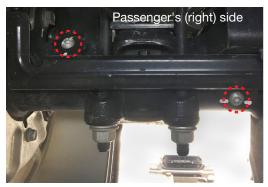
File or die grind slots in the existing bracket holes to get the holes to line up enough to reinstall the screws
